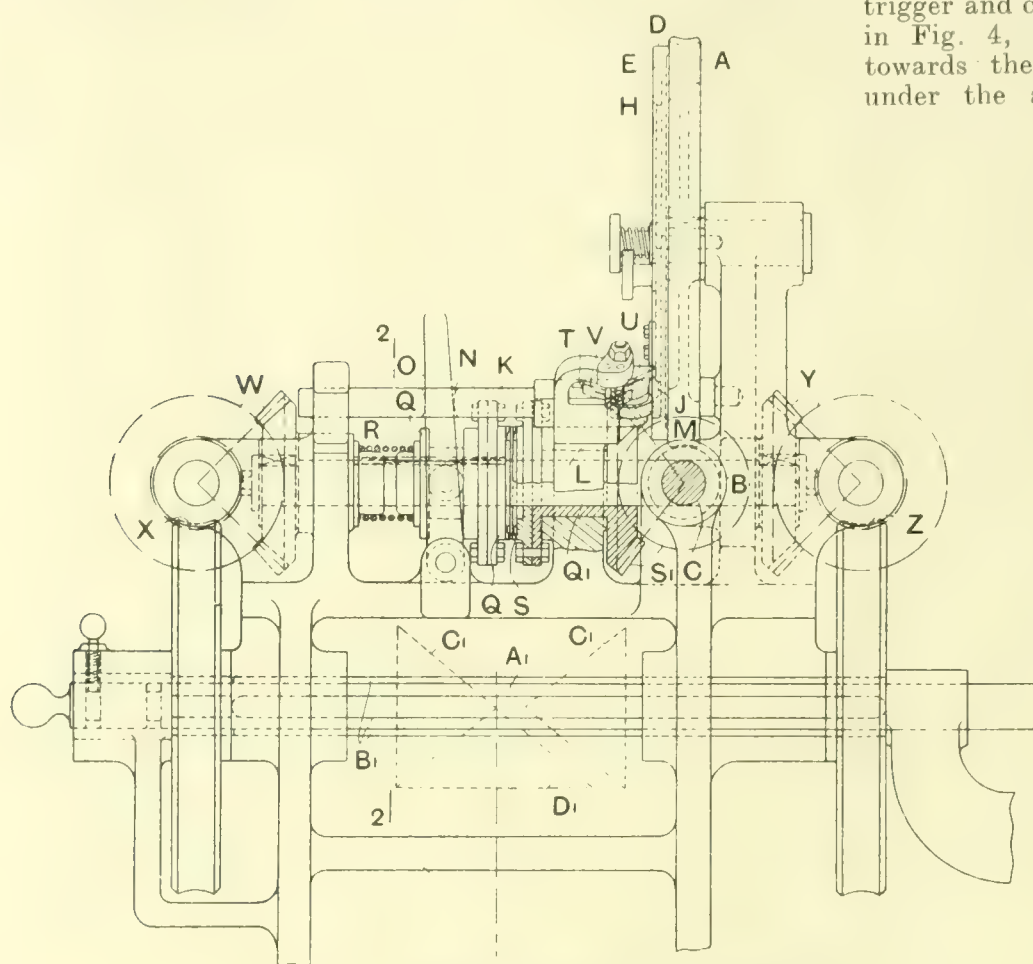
FEED MECHANISM FOR PLANING MACHINES.
